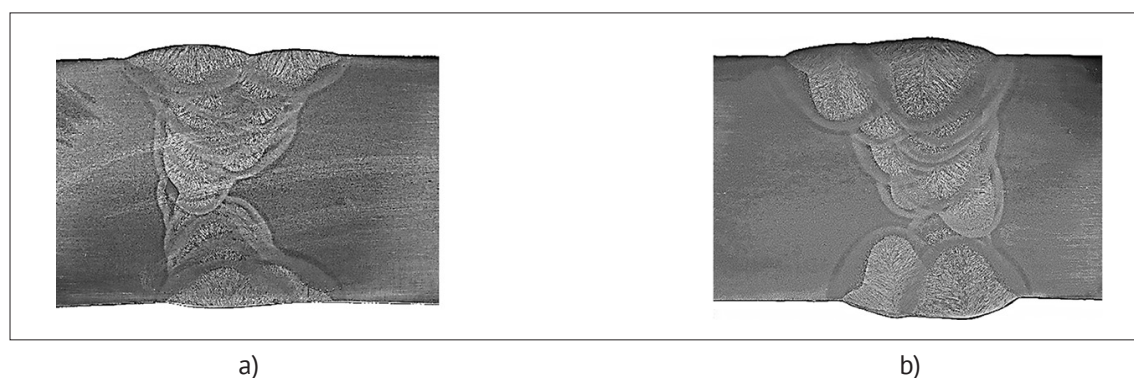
Macro-structure of welded joints of steel of category E36: a) $HI=2.5$ kJ/mm; b) $HI=4.2$ kJ/mm (x1.5)
